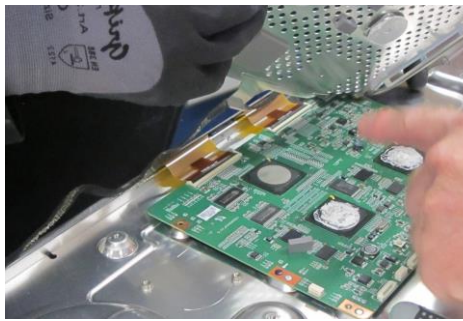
Disassembly of the television; the printed circuit board is sealed off by several metal plates held together by screws and it is therefore both time consuming and difficult to remove them manually
